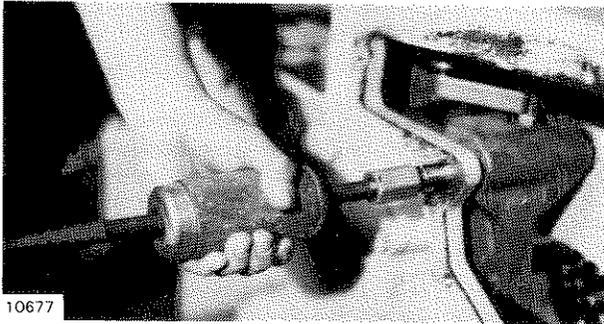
REMOVAL OF THE INTERMEDIATE SHAFT AND DRUM GEAR (Page 2 of 2)
